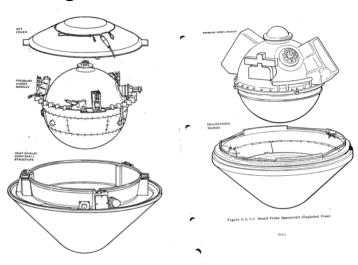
,3,1-1 Large Probe Spacecraft (Exploded View)
